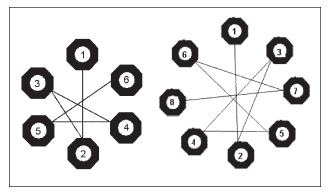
Tightening sequence for 6 and 8 bolt rims
